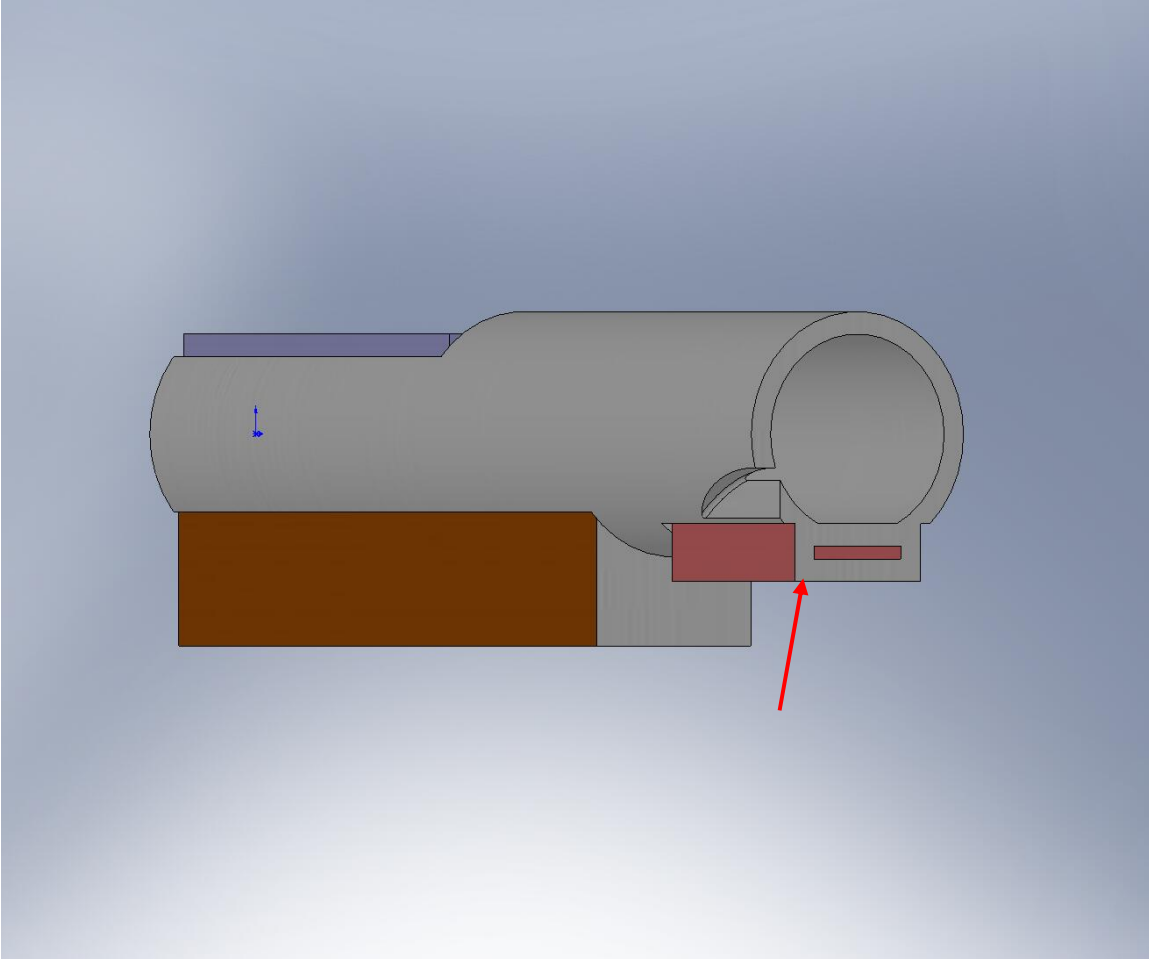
Cross-section view of Crossbeam, showing mid-plane of Support Tube Clamp interface. This interface is created by a welded-on steel extrusion, with 1/2" wall thickness. Full details of the interface have yet to be defined. Note also the scallop cut in the tube, which is described above, in Figure 6.
